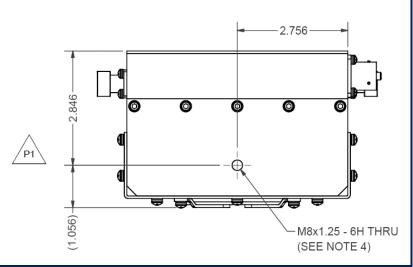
10W BUC Layout Dimensions (sheet 1 of 2)
